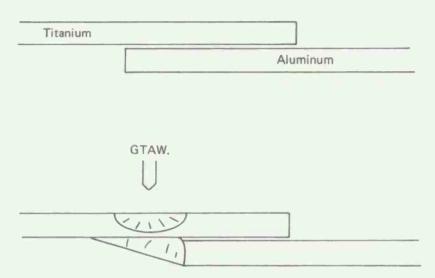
Two-weld-pool technique for joining titanium to aluminum.
